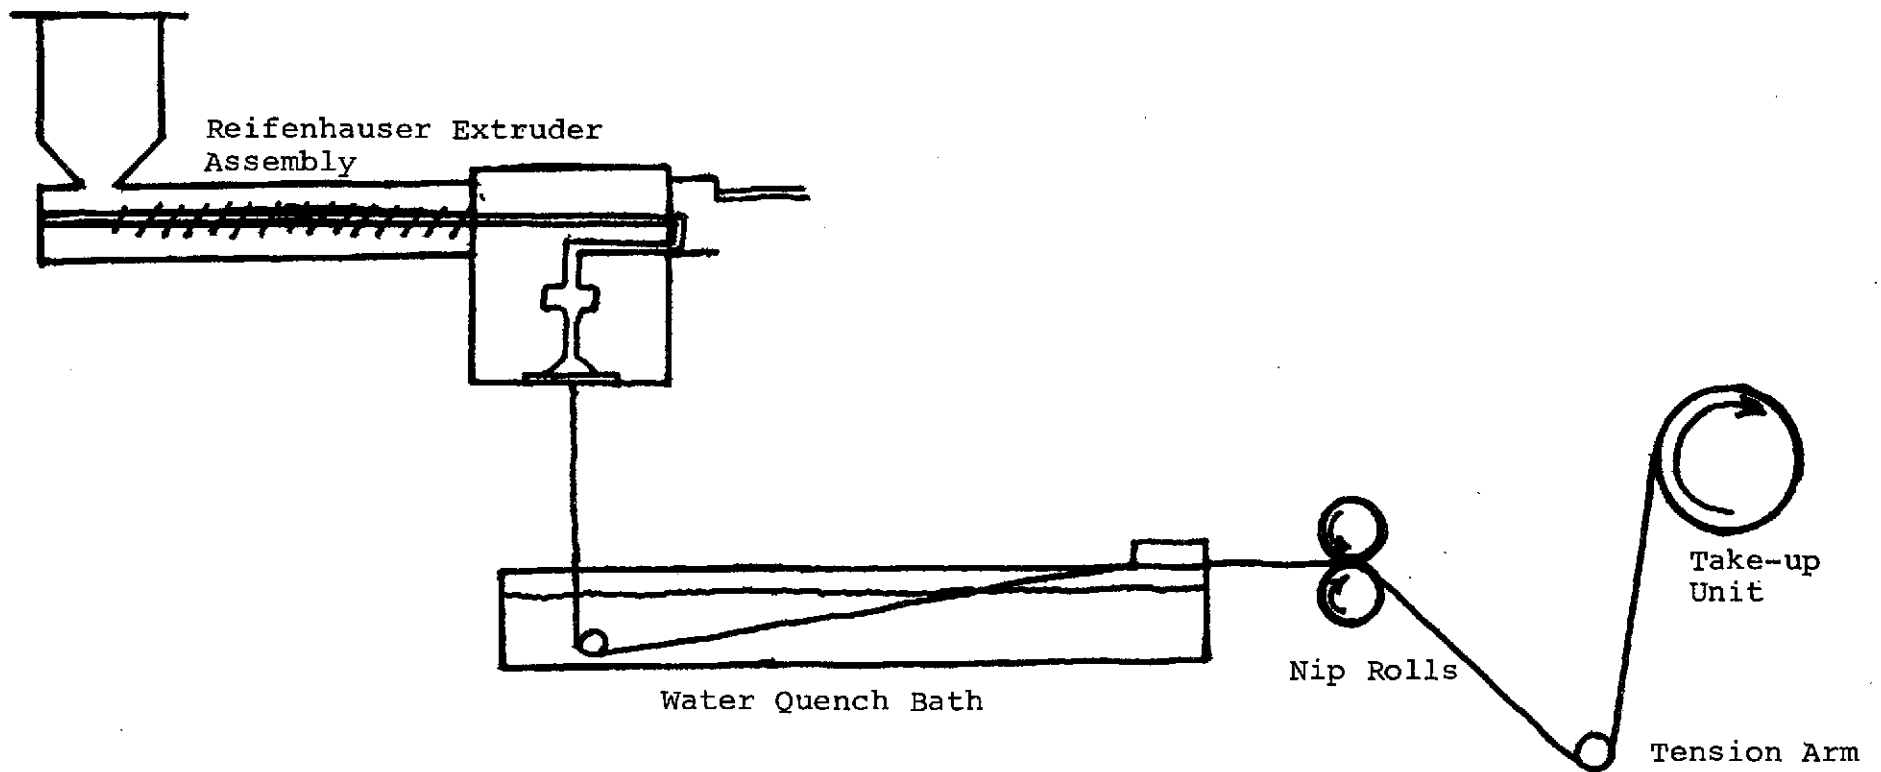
MONOFIL QUENCHING ASSEMBLY AND TAKE-UP ASSEMBLY
